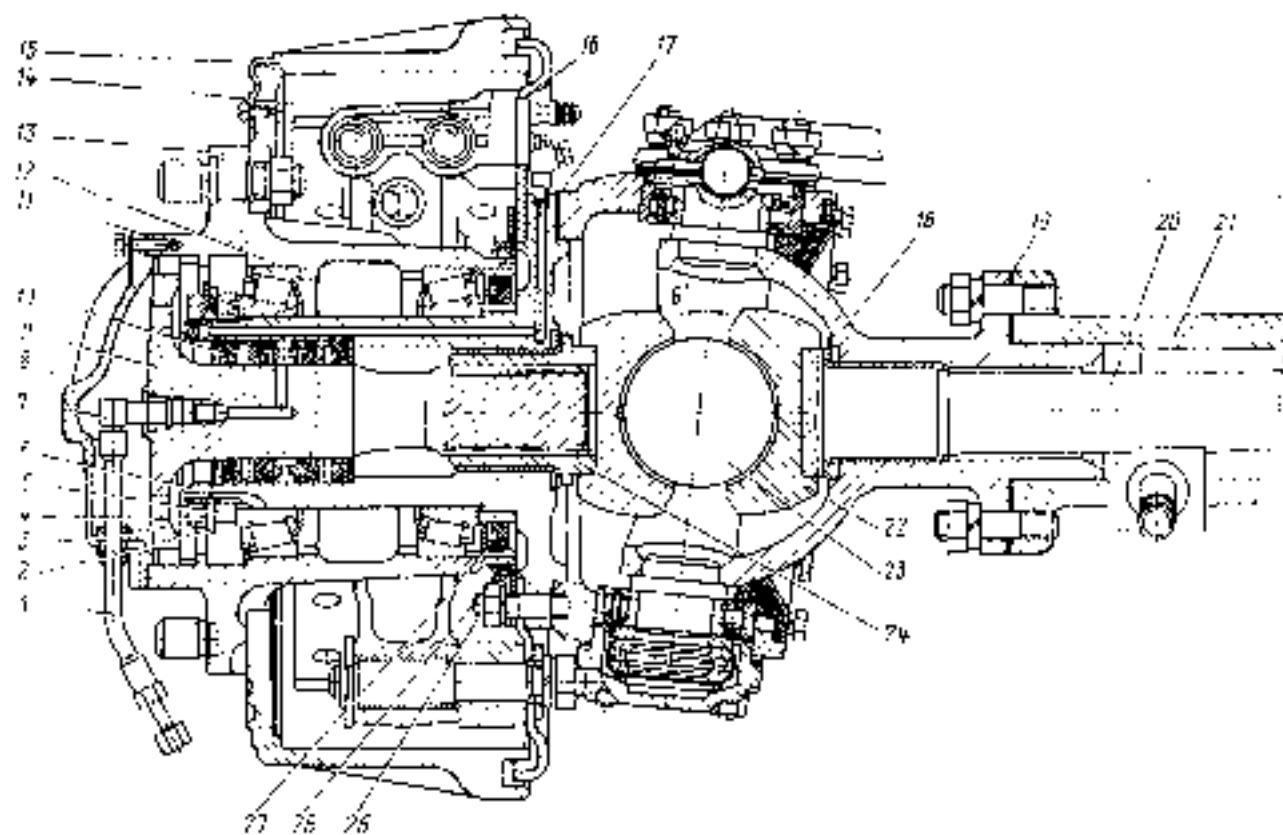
Drive to Suspended Wheels of Front Drive Axle
